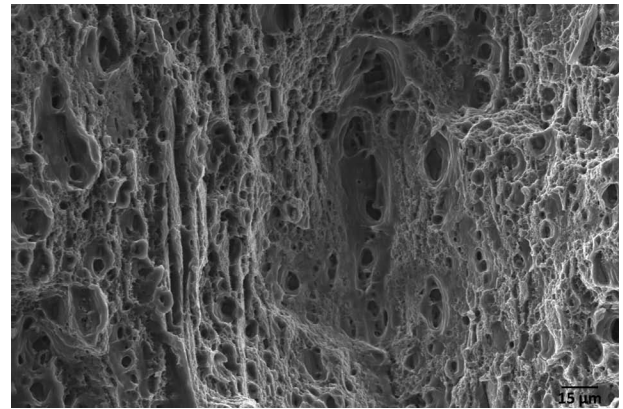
High magnified image of the fracture surface shown in Fig. 193 indicating dimple features indicating ductile failure
